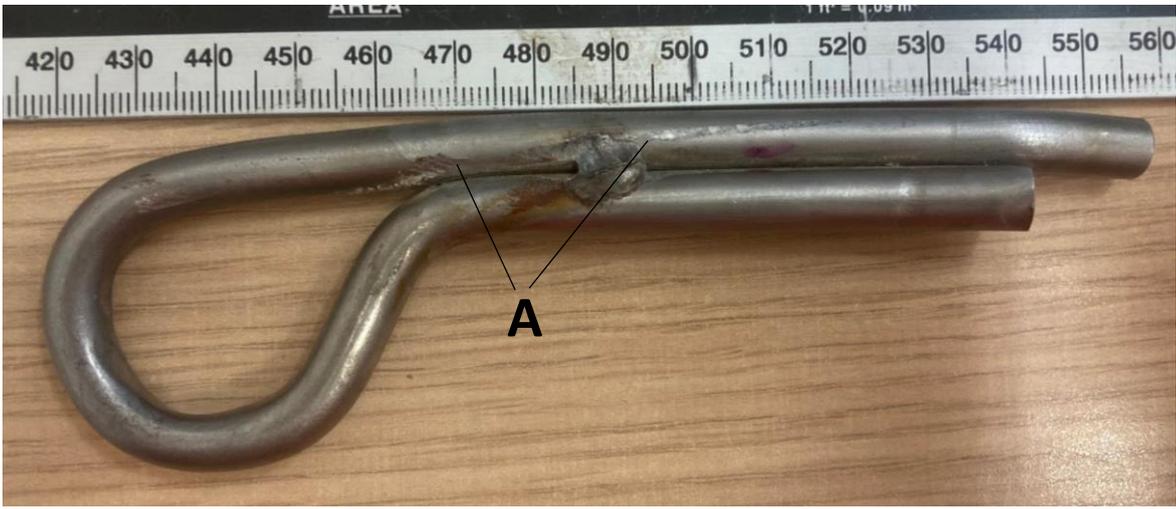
DMM A92 right side view. Drill marking 430, 465, 480-510mm,
